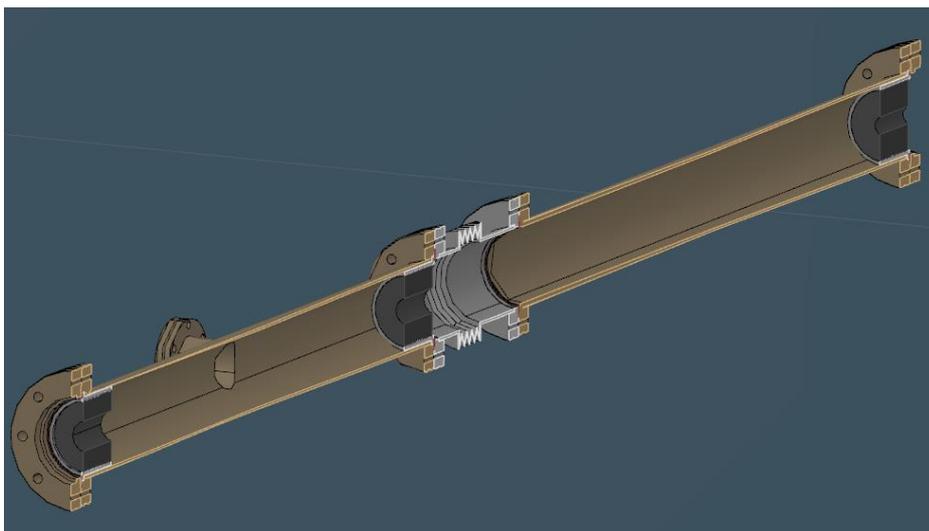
Setup of the Absorbing Baffles within the Vacuum Tube
